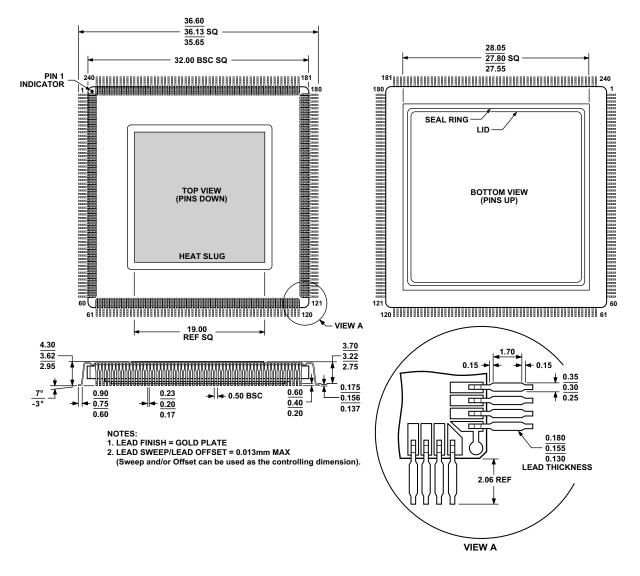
240-Lead Ceramic Quad Flat Package, Heat Slug Up [CQFP] (QS-240-2A) Dimensions shown in millimeters
